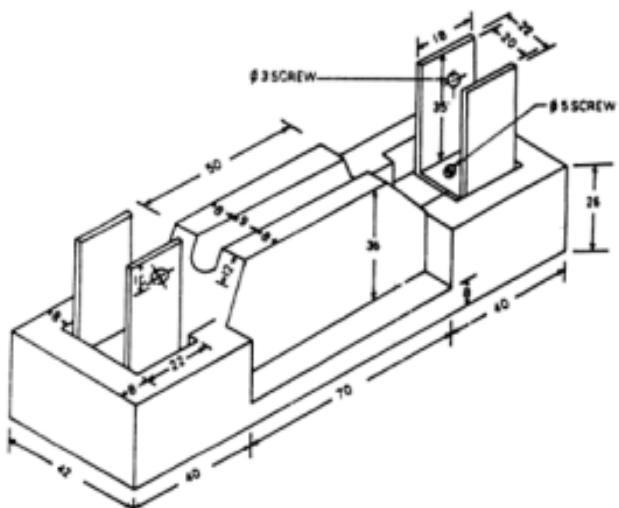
One part of a kit-kat fuse assembly shown in isometric view
